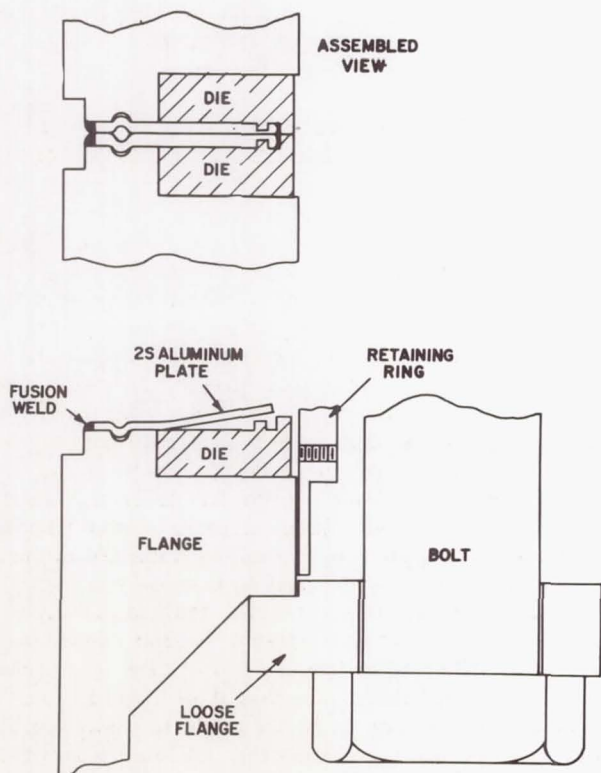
Basic Cold Welded Flanged Connector Configuration
